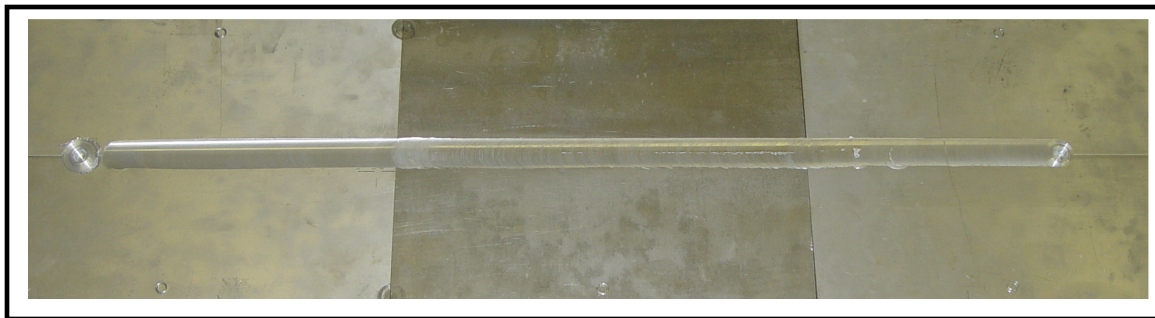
FSW-weld (5083 – 2024 – 5083 alloy).
